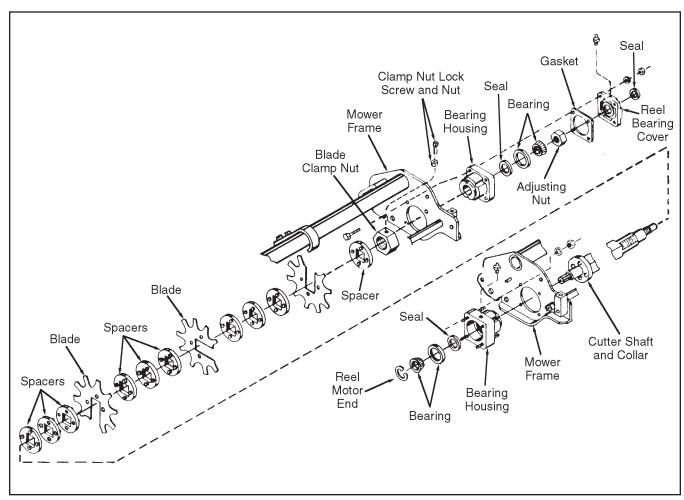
B-1. Disassembly and Reassembly of Vertical Mower Assembly
